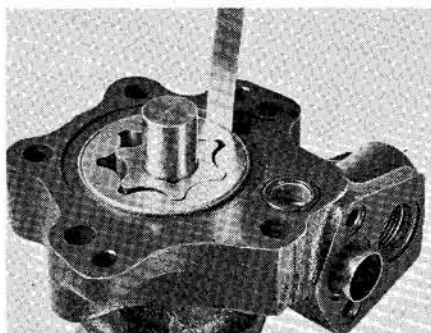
Measuring driven rotor to pump body clearance. If clearance exceeds 0.006, renew rotor set and/or pump body.
